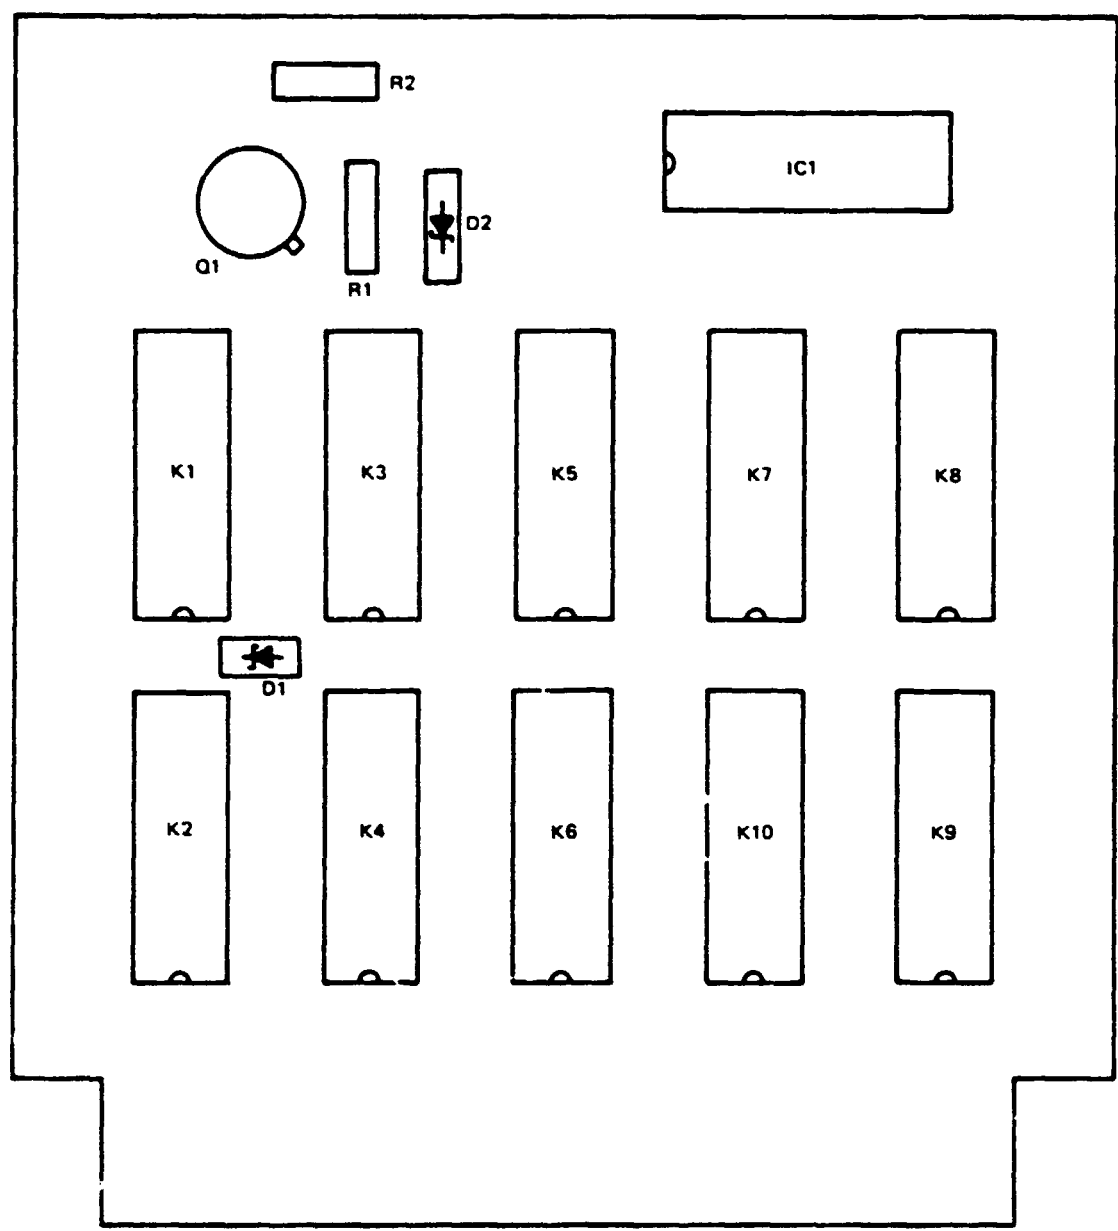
Temperature scanner remote unit - relay card layout (sheet 6 of 9)
